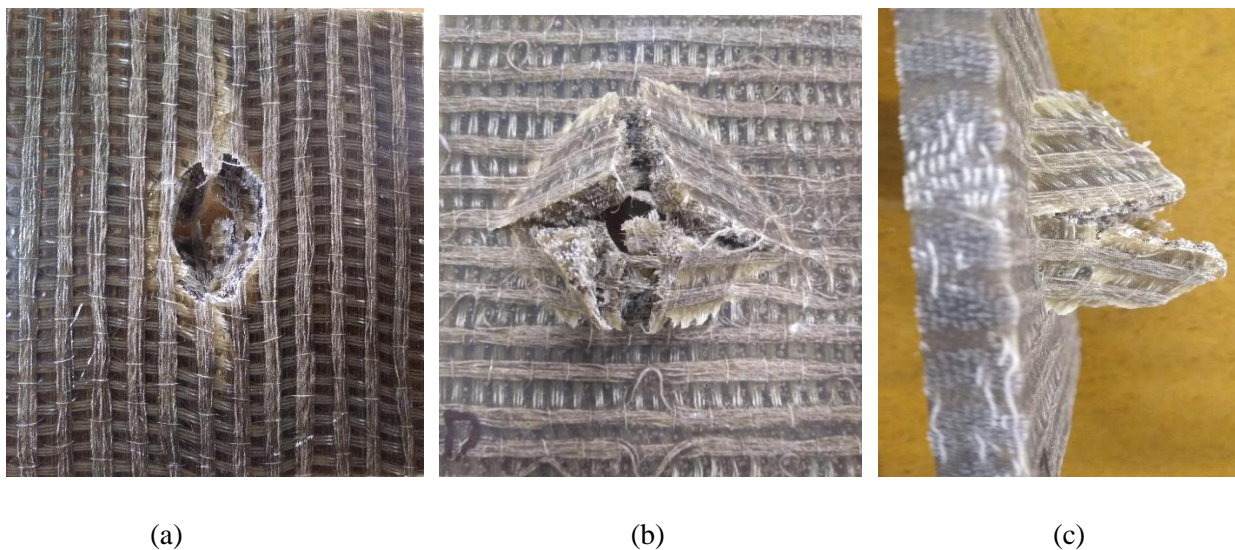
Tup impact specimen (a) Front view, (b) Back view, and (c) Side view
